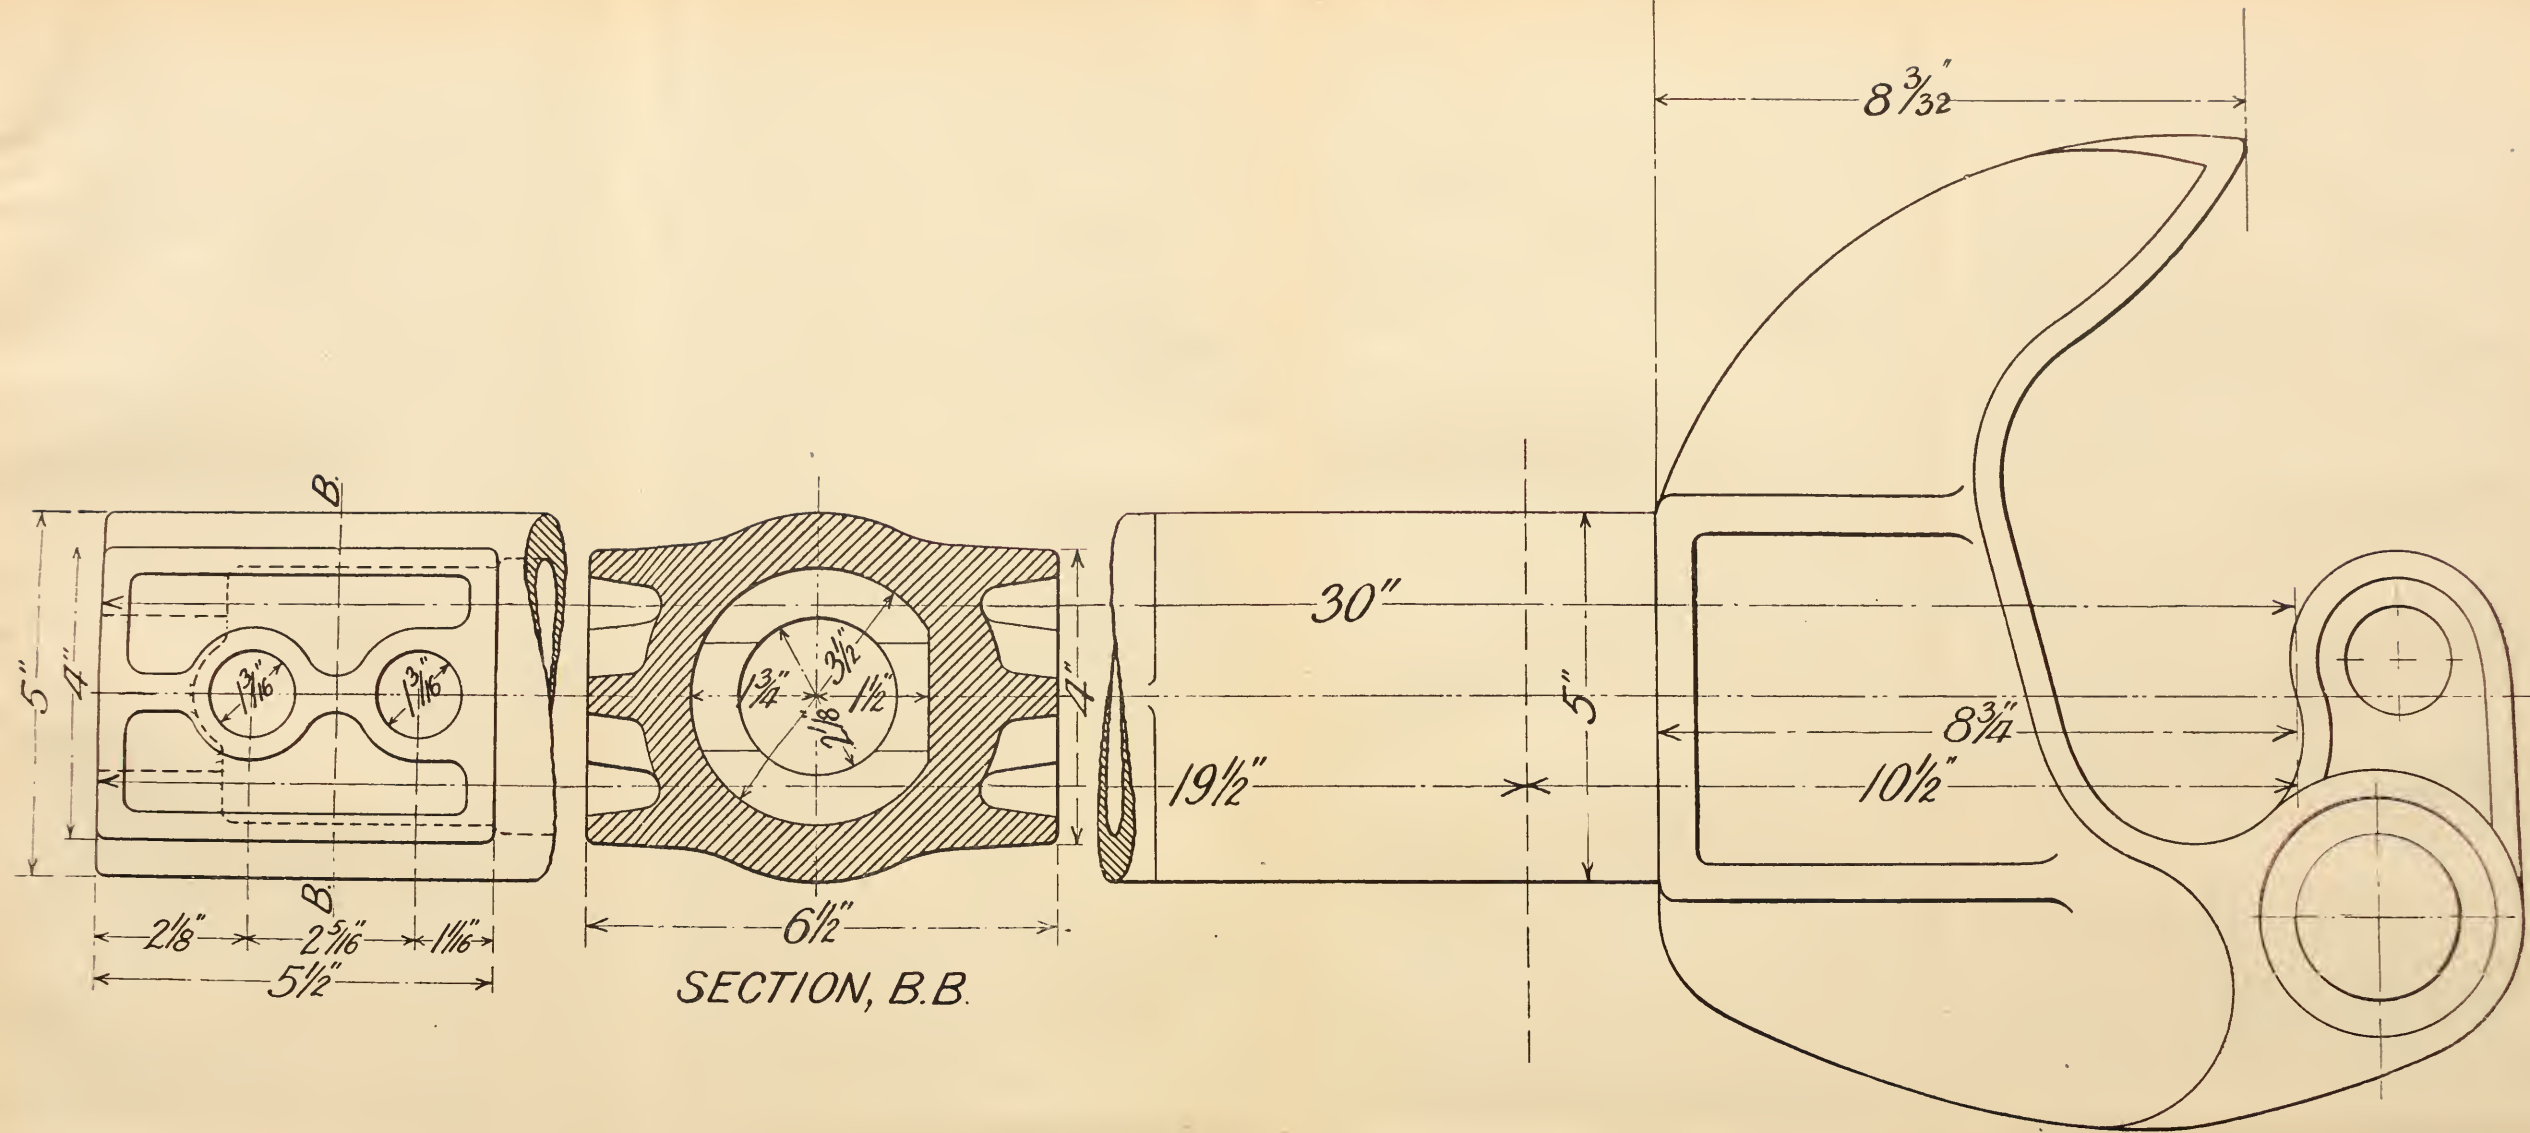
M. C. B. Coupler drawing amended to give dimensions of guard arm.
